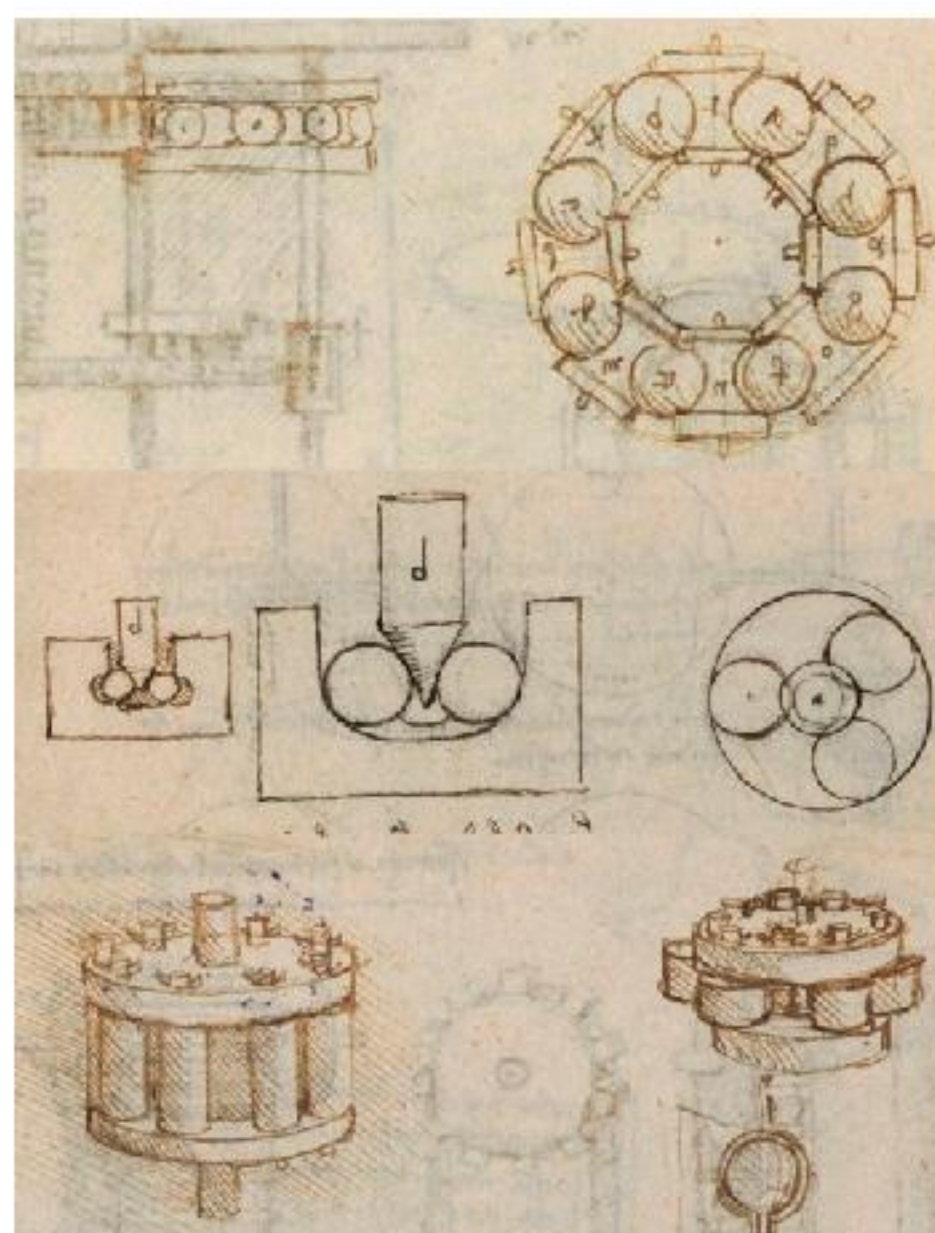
Ball, conical, and roller bearings (top to bottom). The design of the conical bearings is probably superior to that patented by Julius Vom Hofe in 1882.
